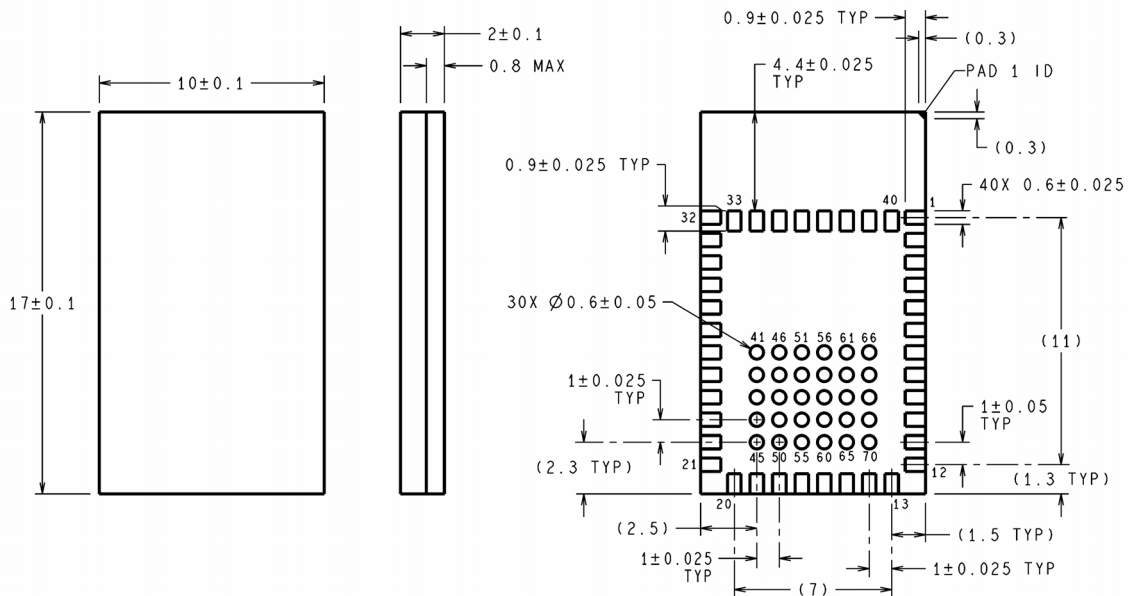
Physical Dimensions - "Dimensions are in Millimeter" () for reference only
